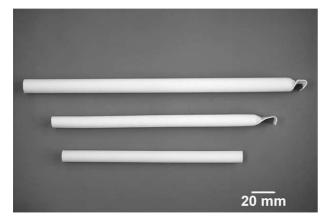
Photograph of an extruded tube with suspension, a sintered tube with suspension and a sintered tube after separating the suspension.
